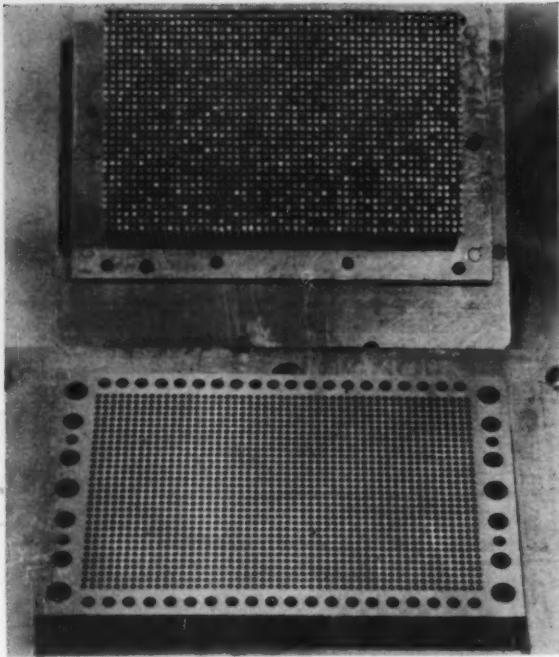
Punch and die for punching 1600 holes at one stroke in $\frac{1}{8}$ in. thick cardboard to form a punchboard.
